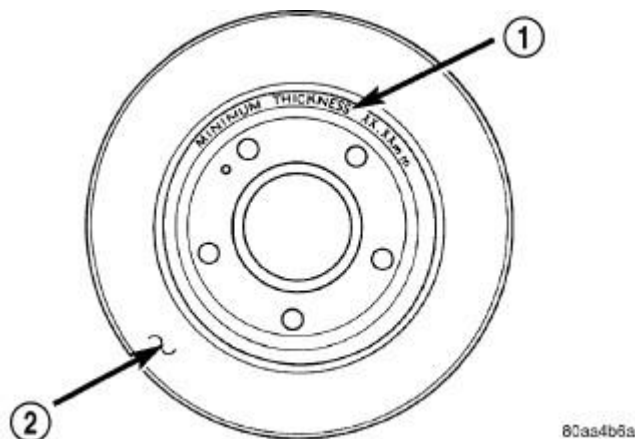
Minimum Brake Rotor Thickness Markings (Typical)
